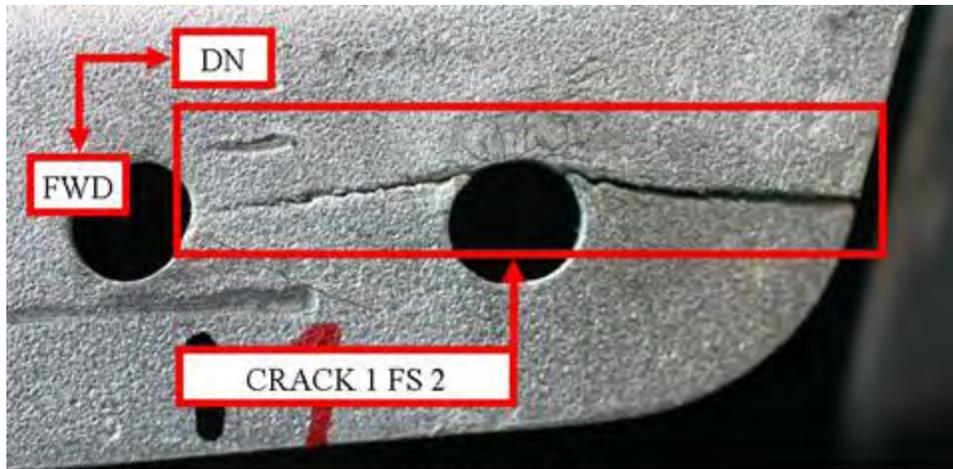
Location of Cracks on the Fuselage Web-Beam Assembly Lower Forward Frame Right Side FS 2
